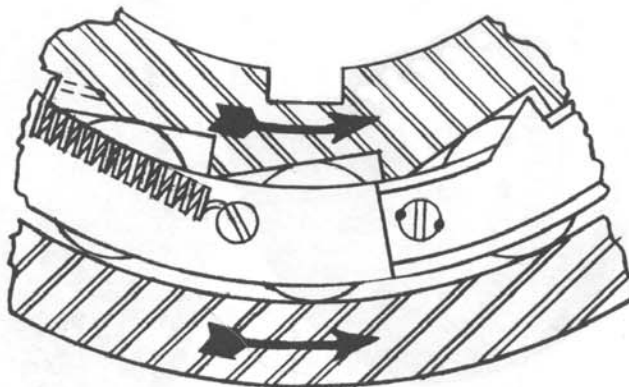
Assembled position of cam unit and roller assembly for ANTI-CLOCK freewheeling rotation of outer race. Also driving rotation of cam, when looking at coverplate side of outer race.
